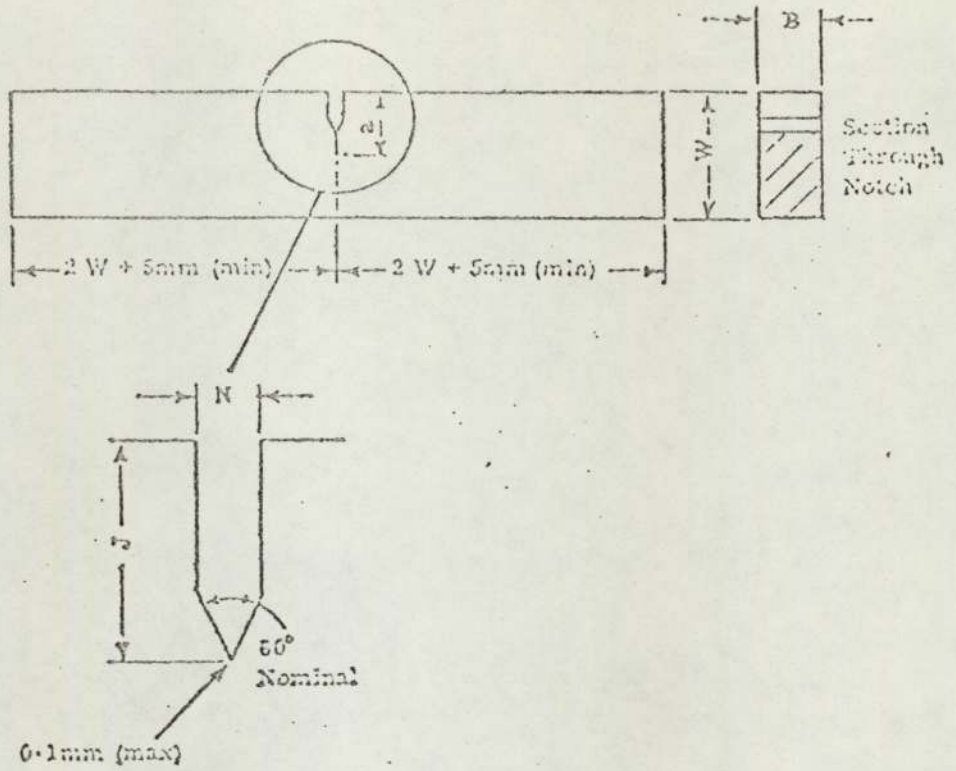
Dimensions of Single-Edge-Notch Bend Test-Piece.
